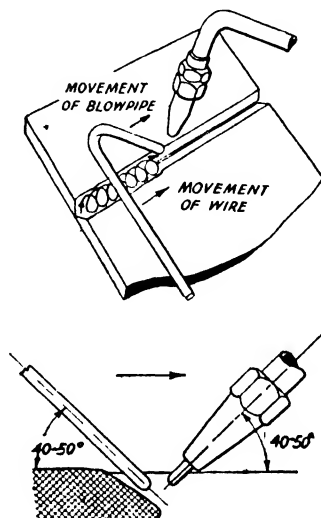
RIGHTWARD METHOD OF WELDING
